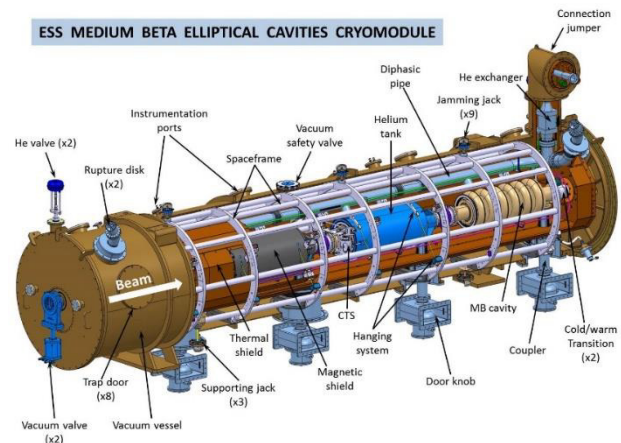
Elliptical cryomodule 3D view equipped with medium beta cavities.
